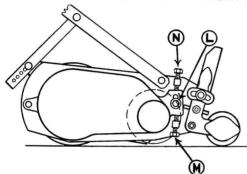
Method of Adjusting Blades ("Ladies" Model).
